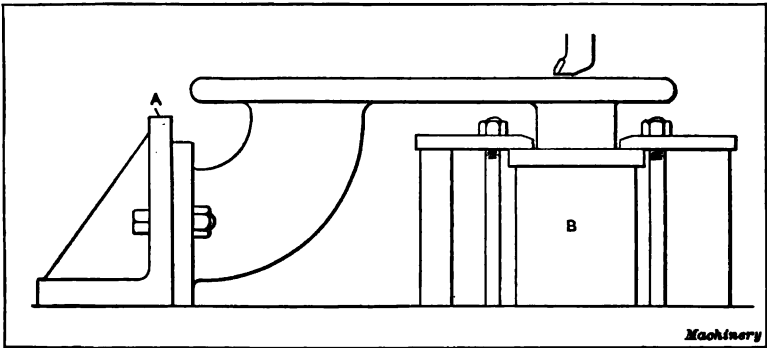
Use of Angle-plate in Conjunction with Clamps for Holding Work
